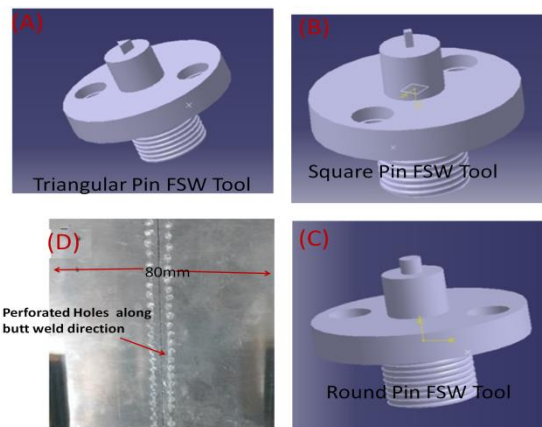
Types of tools and Workpiece (a) Triangular Pin (b) rectangular pin (d) round pin FSW tool (d) Workpiece with perforated holes along weld direction
